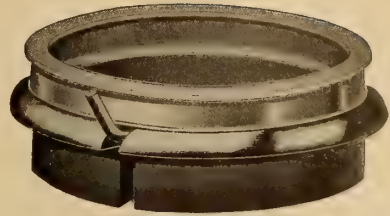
DOUBLE RING IN CAST-IRON HOLDER, WITH WIRE TRAVELER CLEARER
